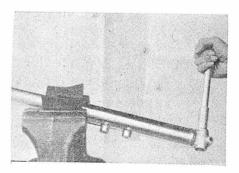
Take precautions to prevent damage to fork outer tube nut when clamped in vise. A portion of a discarded tire tube may be used.
